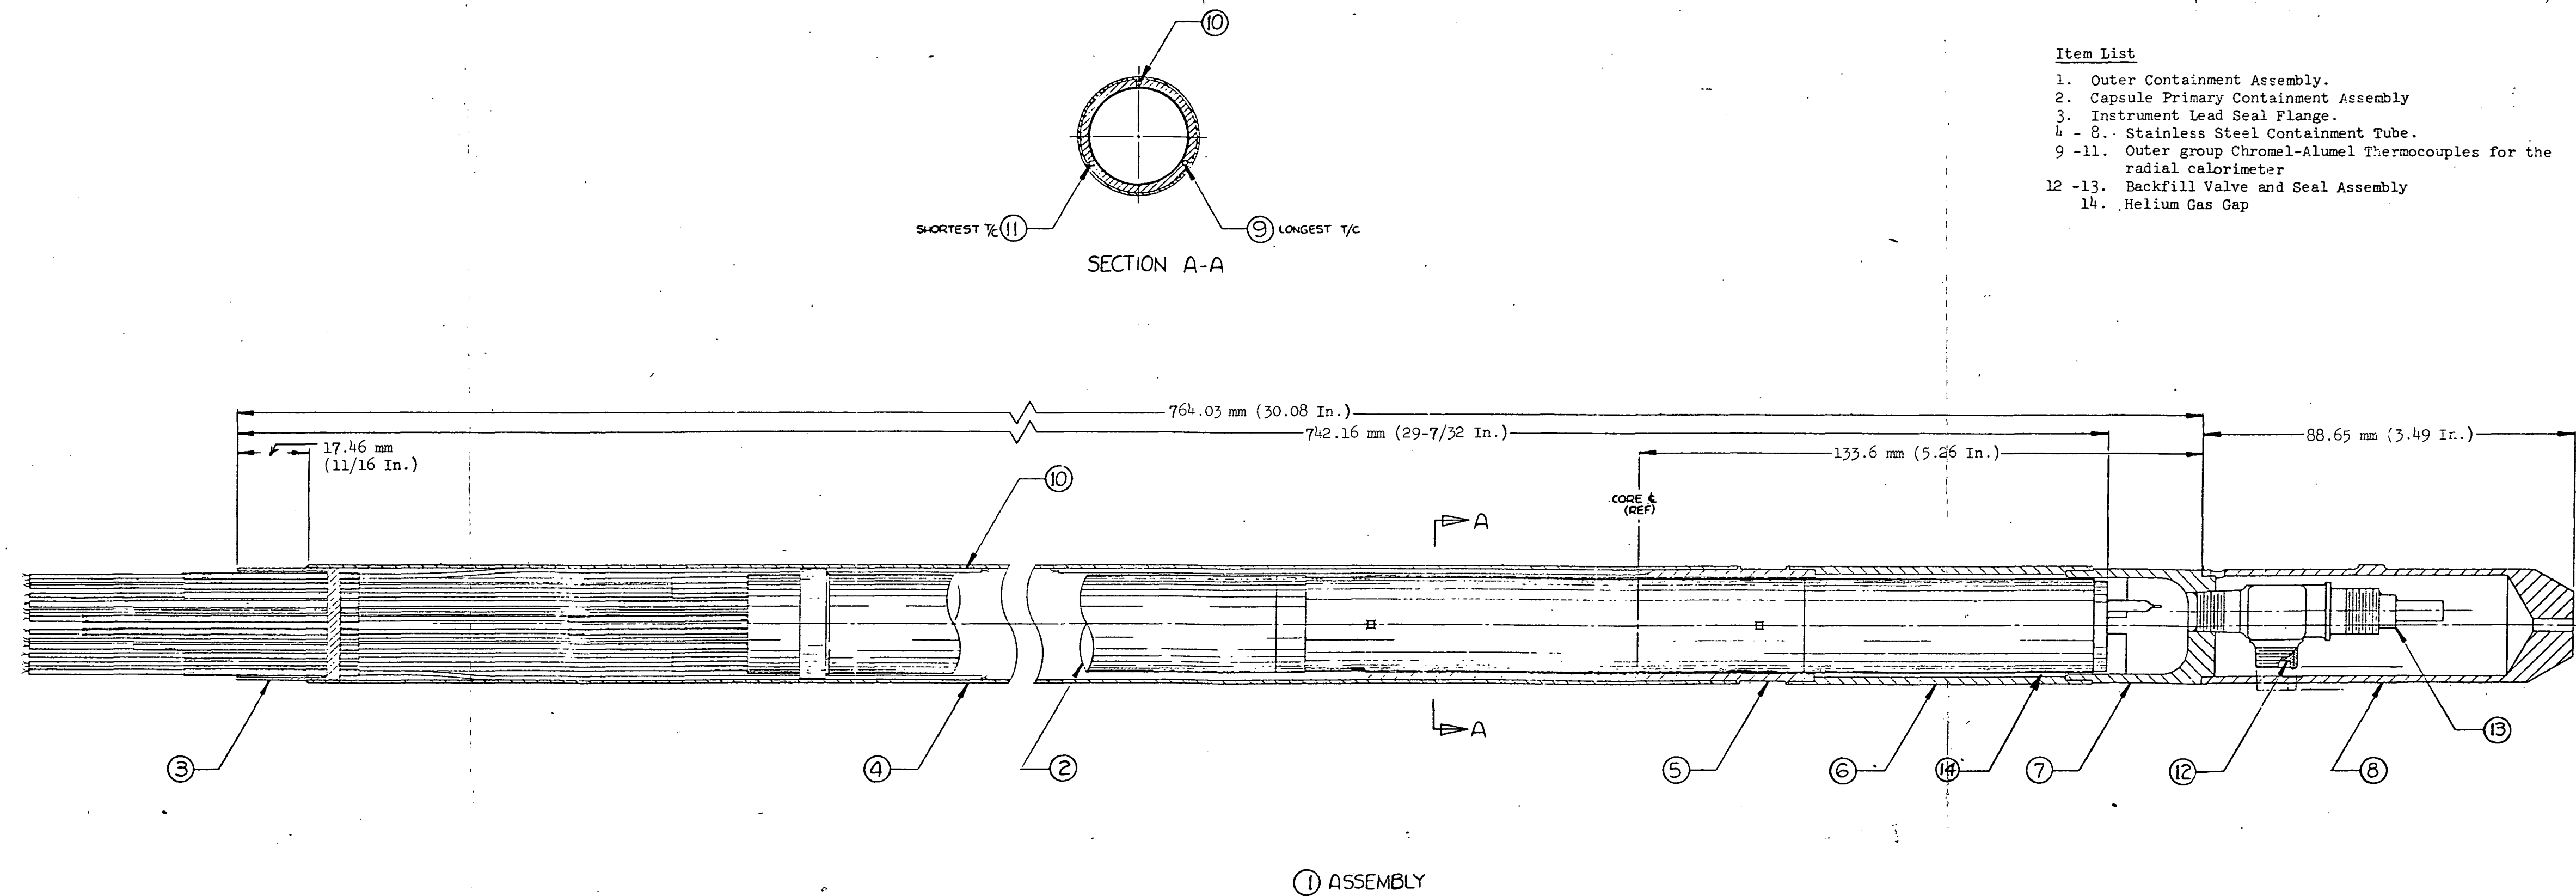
(b). Inconel primary containment assembly of V-2C and V-2D capsules.
